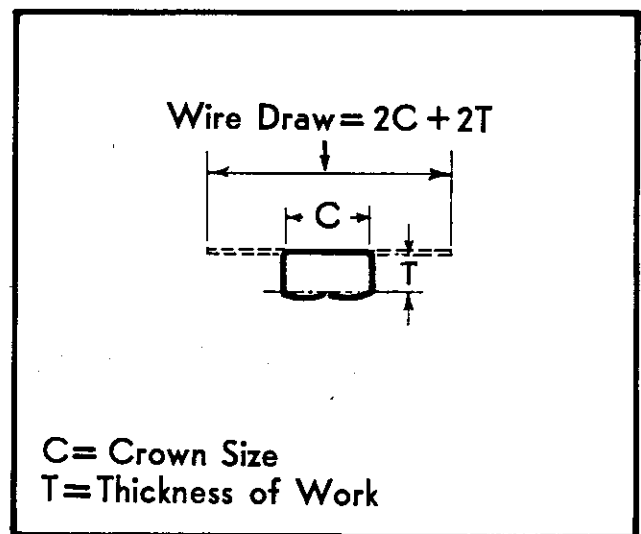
Wire Draw Dimensions and Formula for .175 thru 1/2" Crowns
